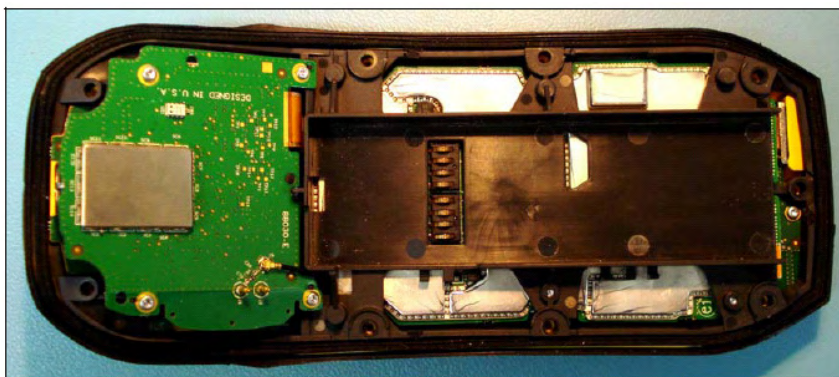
Underside of GeoExplorer 6000 Chassis, showing Battery Swipes and sensor card mounted
